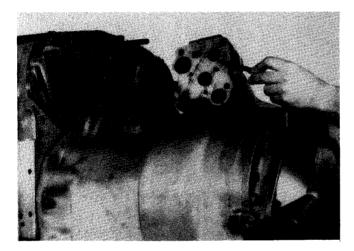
Remove pressure regulating valve assembly and "O" rings.
